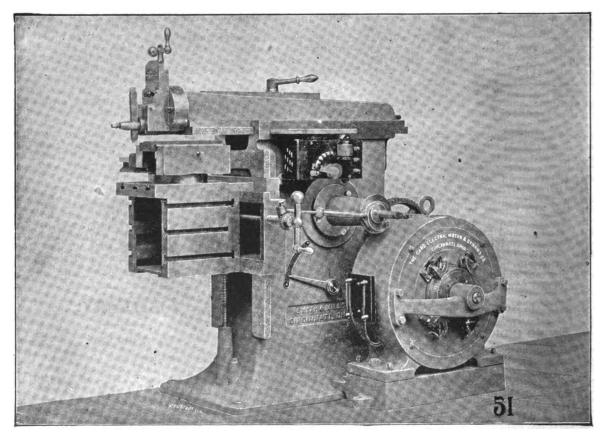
Shaper Direct Driven by Card Motor, Paterson Edison Station.
